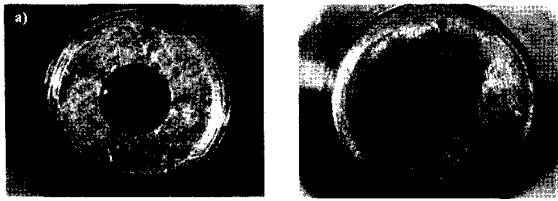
Shape of contact tip outlet hole: (a) as-received condition, (b) wear-out condition after welding
